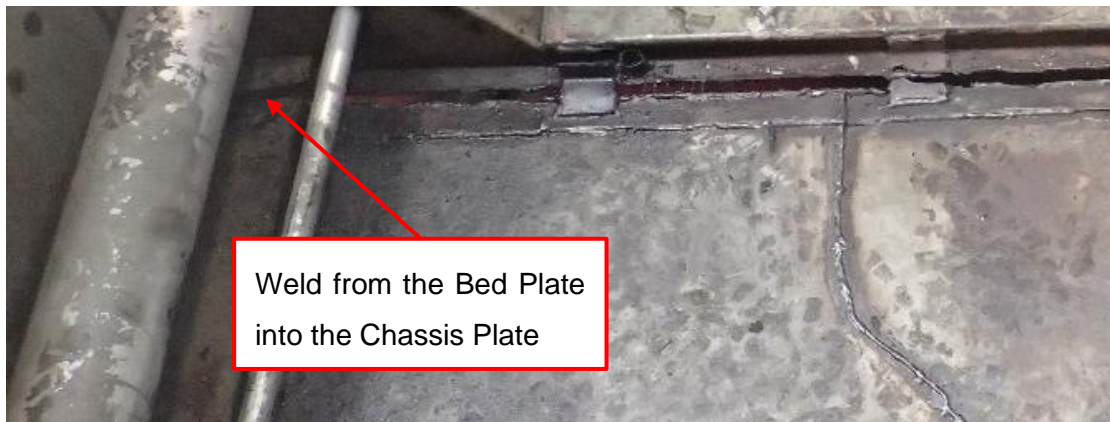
Weld from the Bed Plate into the Chassis Plate
